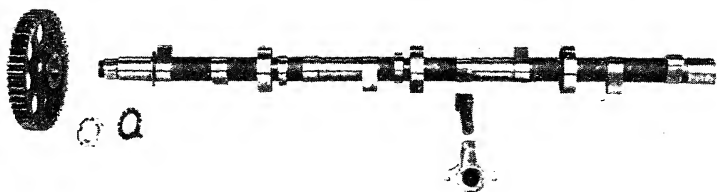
CAMSHAFT, GEAR AND TAPPET.
